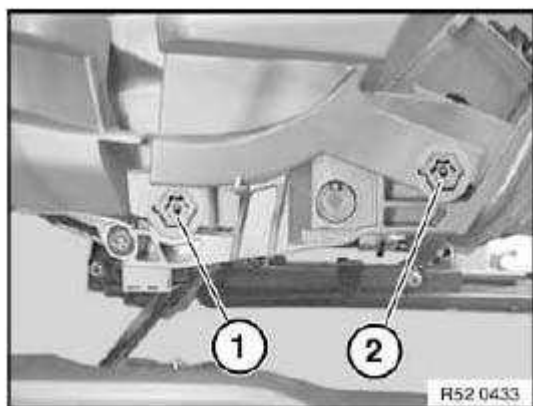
Adjusting Screws And Eccentric Disks (Actuating Unit Version B)
